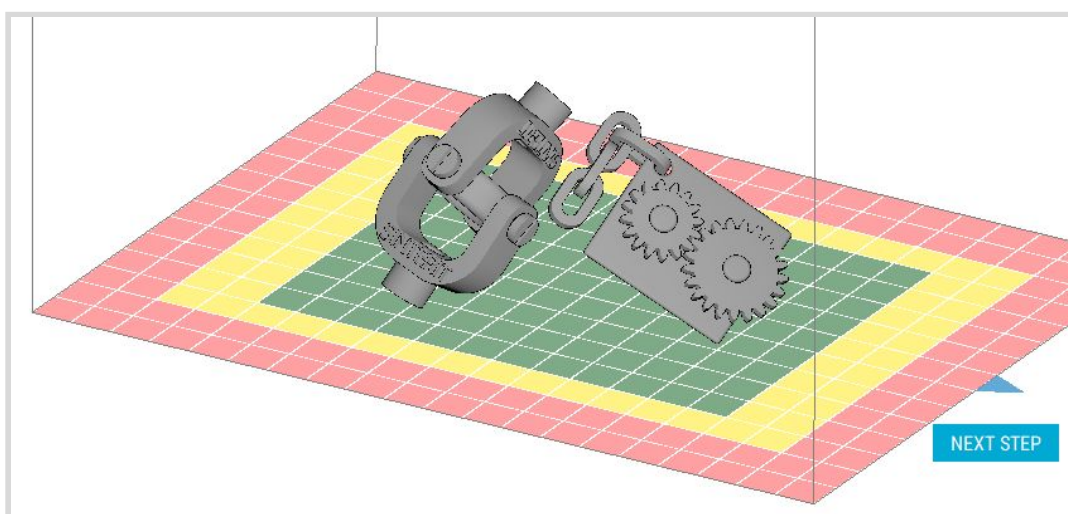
Incorrect arrangement, which may cause sticking of moving parts to surfaces.
